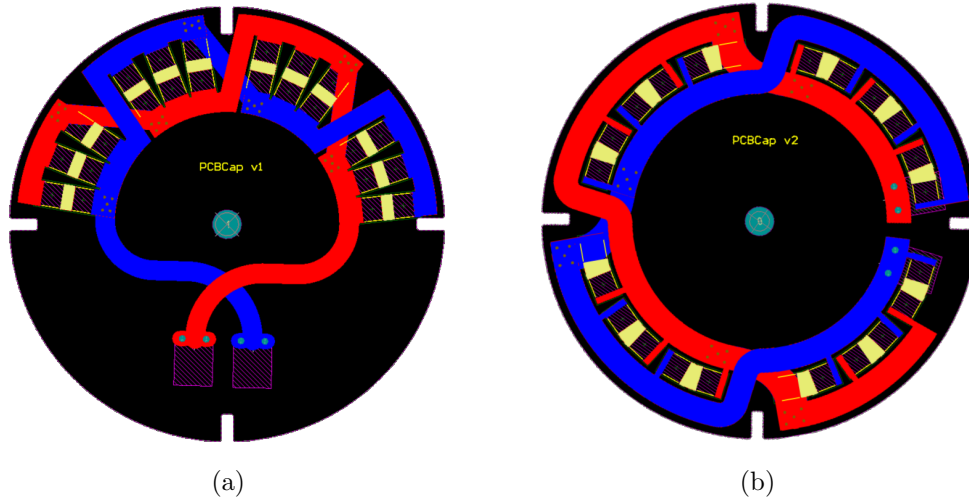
PCB schematics of prototypes: (a) PCBCap v1 and (b) PCBCap v2.
